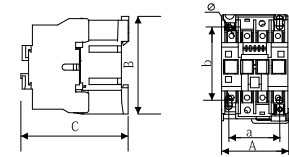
Outline and Installation Dimensions of CJX2-09~32 AC Contactor
